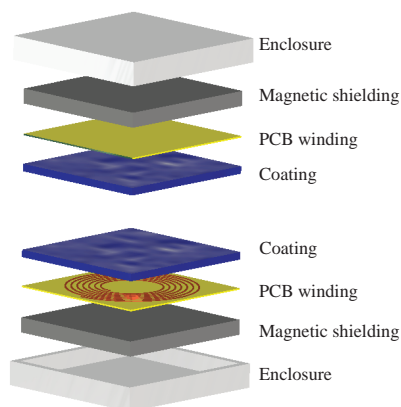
A coil system containing PCB winding, ferrite plate, enclosure and the dielectric coating.
